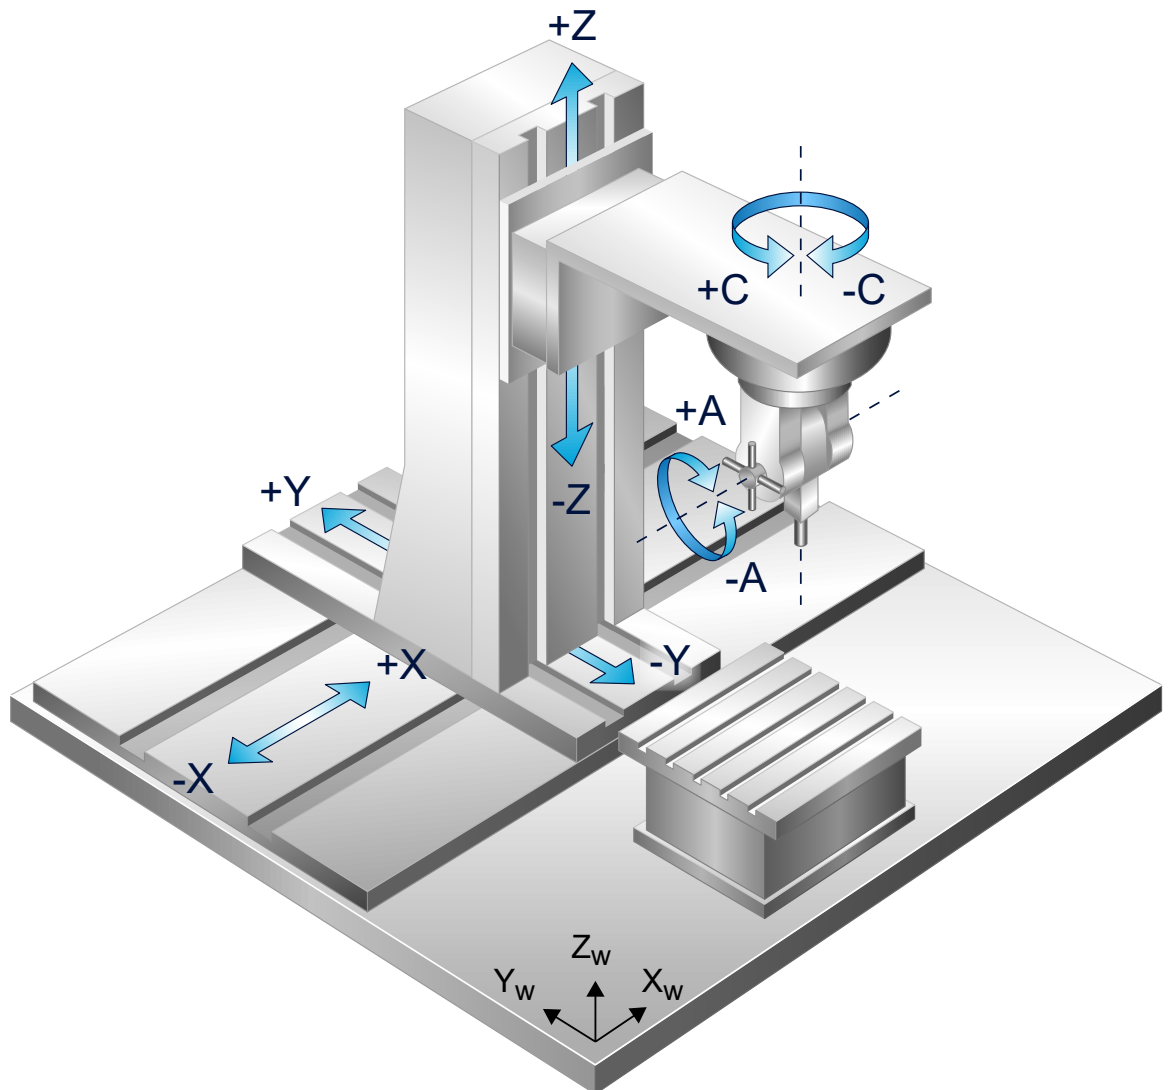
5-axis kinematics (boring and milling tool with manual auxiliary axis A)
